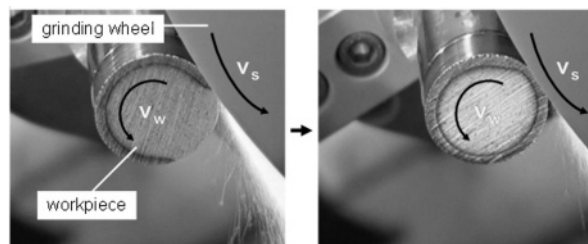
Surface hardening of a cylindrical workpiece (diameter = 20 mm) by grind hardening.
